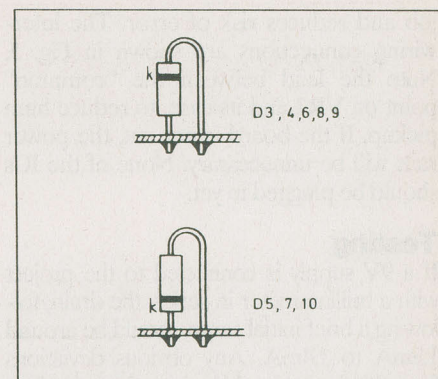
Polarity guide for mounting the diodes on the PCB.
